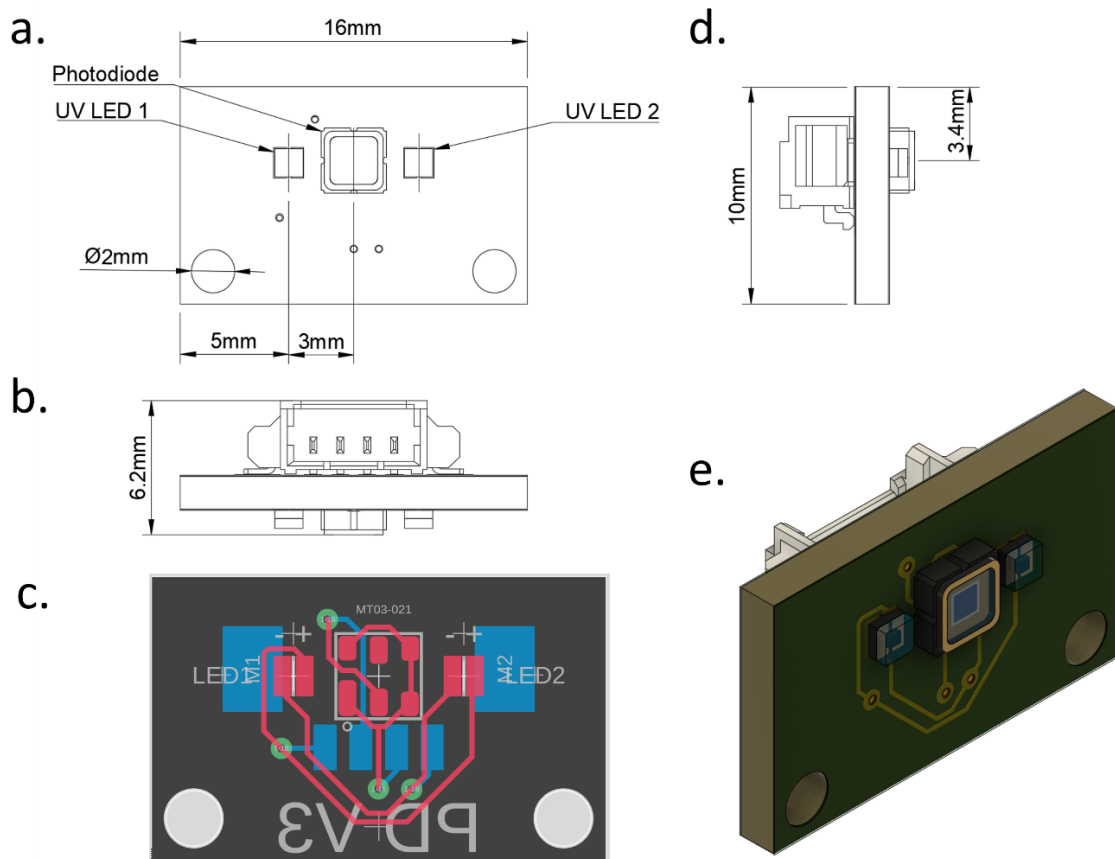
MT03-021 Photodiode and UV LED printed circuit board design (PCB). (a) Dimensioned top view of board with labelled LEDs and photodiode. (b) Dimensioned front view of board. (c) Design layout of PCB design top view showing component placement and trace routing. (d) Dimensioned side view of the photodiode board. (e) 3D rendered view of the photodiode and UV LED board.
